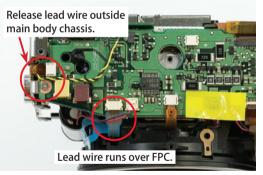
Routing of Lead Wire on Bottom PCB Ass'y (1)
